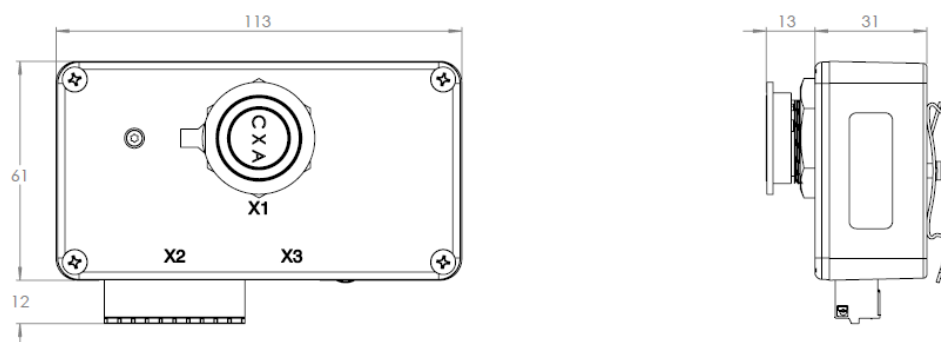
Patch Board Mk2 Enclosure Dimensions (mm)
